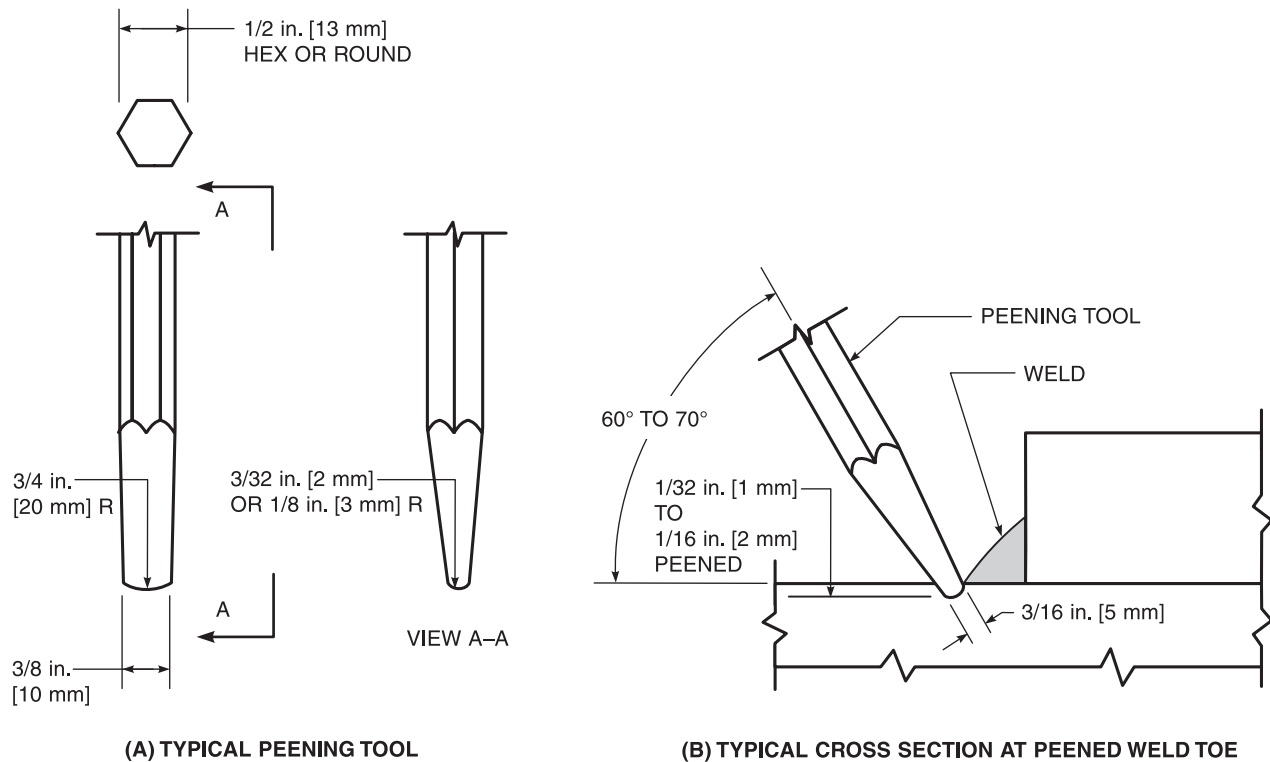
Pneumatic Hammer Peening (see 7.8.4)
